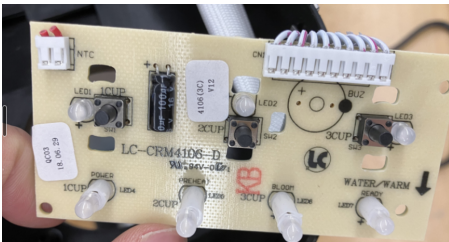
I/O PCB specifically designed for the coffee machine, highlighting the connection ports and components.
